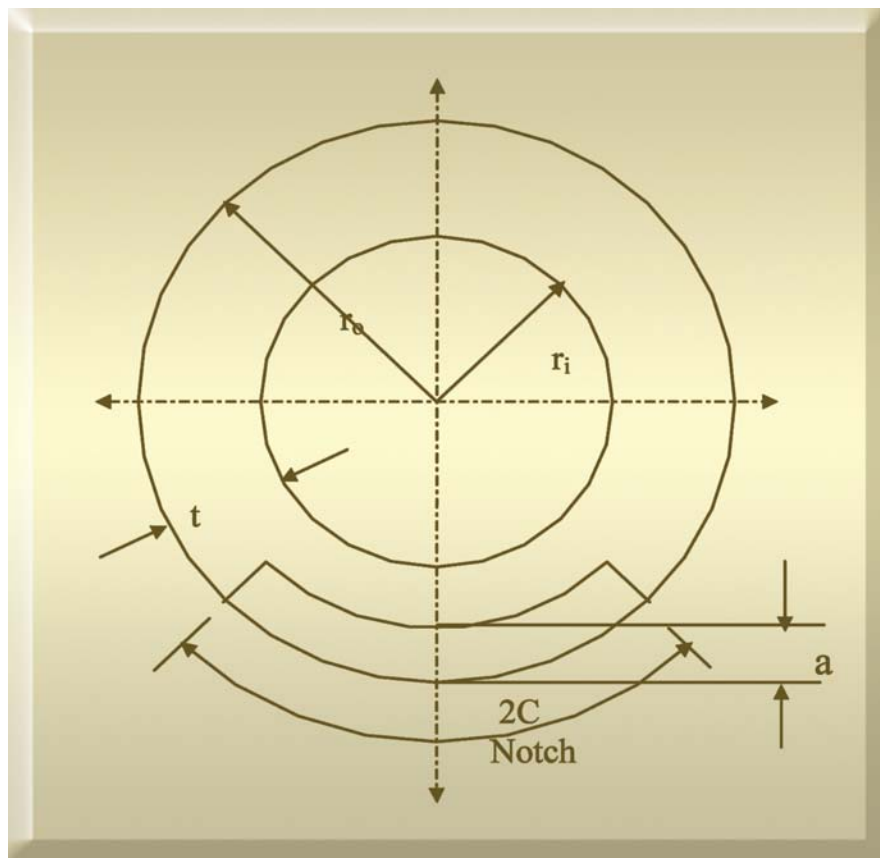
(b): Pipe cross section of notch plane with circumferential, rectangular, external surface crack
